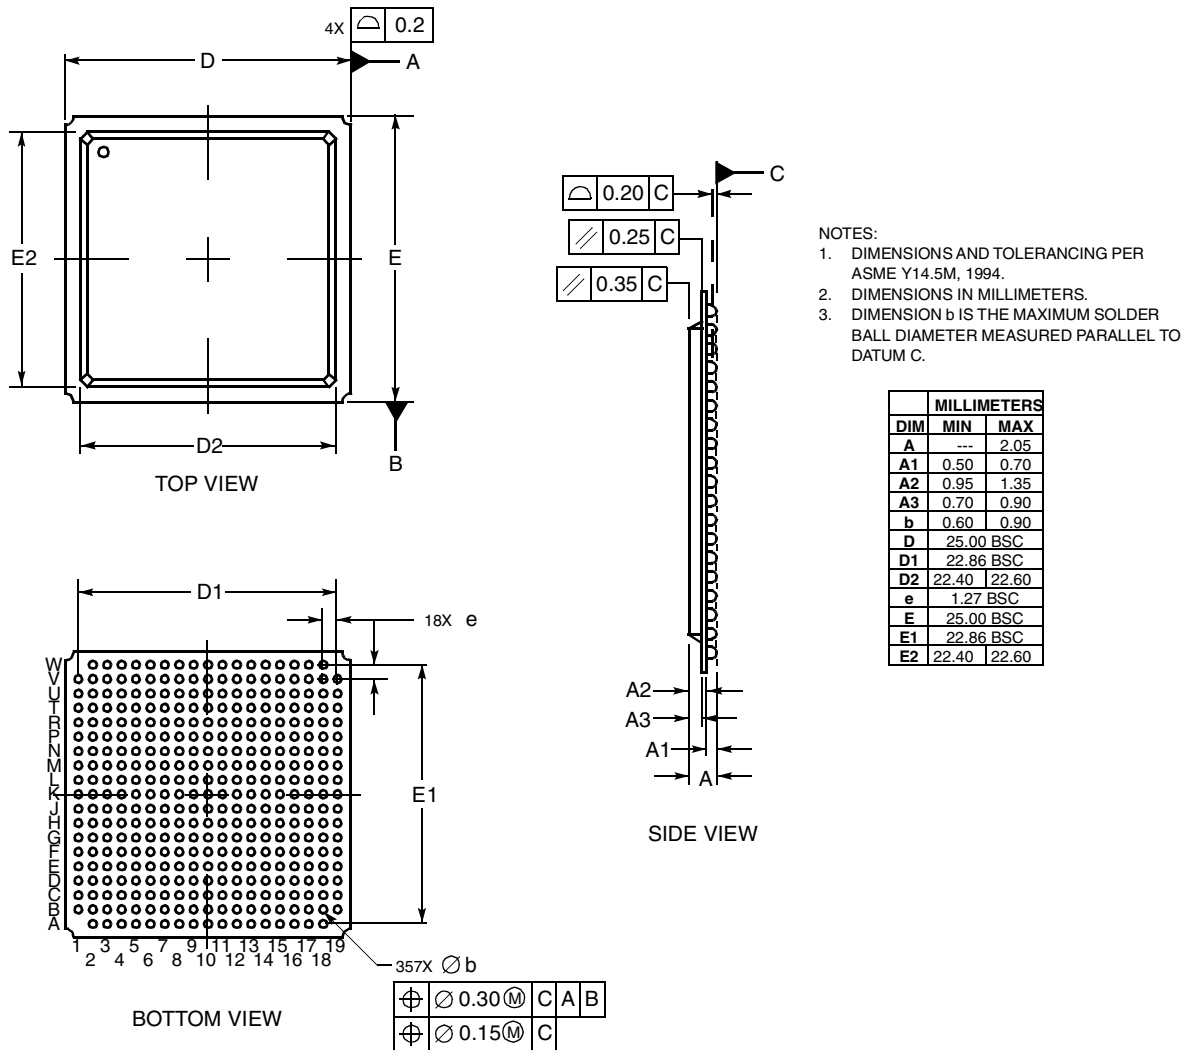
MPC8241 Package Dimensions and Pinout Assignments (ZP Package)
